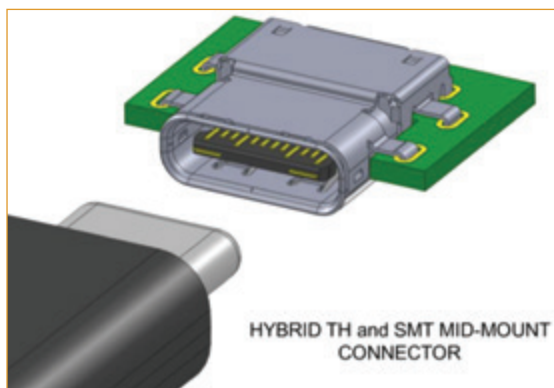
The PCB hugs the connector on three sides, all of which are critical dimensions. (Credit: Extreme Tech)
